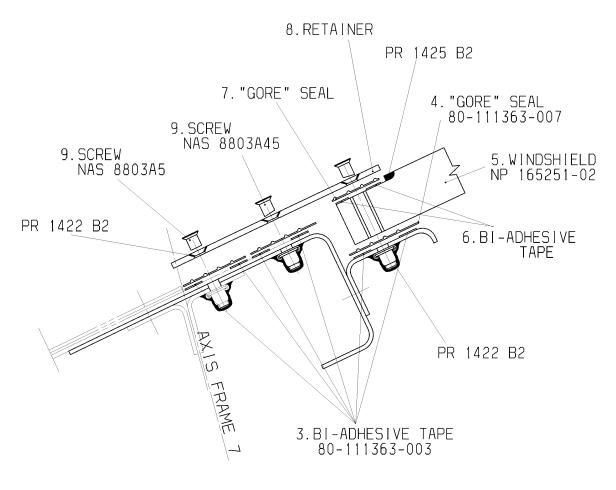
Windshield with "GORE" Seal - Removal/Installation (Sheet 3 of 4)
